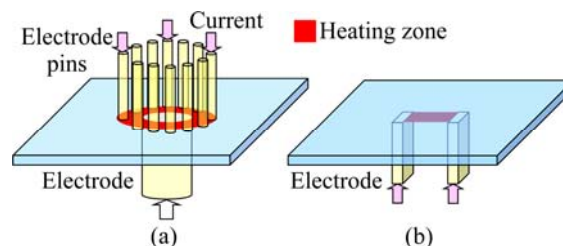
Local resistance heating of hole region for punching: (a) Large hole and trimming; (b) Small hole
